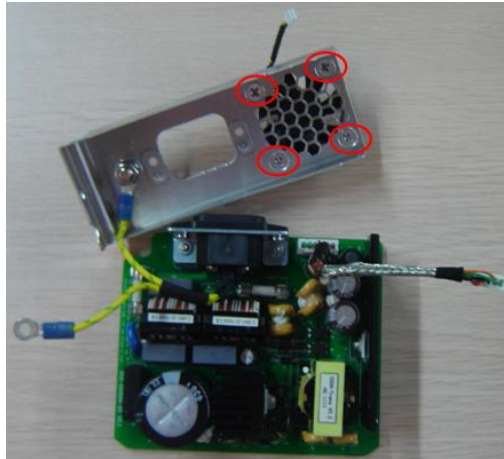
Disassembly of Fan of AC-DC Board (2)
